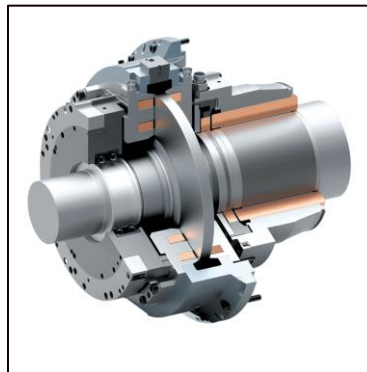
A magnetic bearing from SKF with an inner diameter of 220mm [25]
